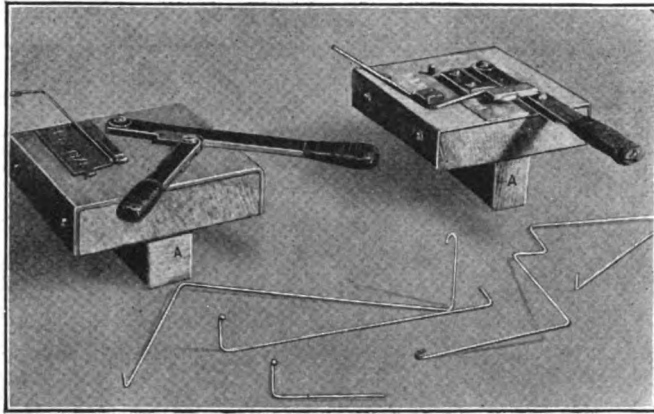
BENDING FIXTURES FOR CONNECTING WIRES
